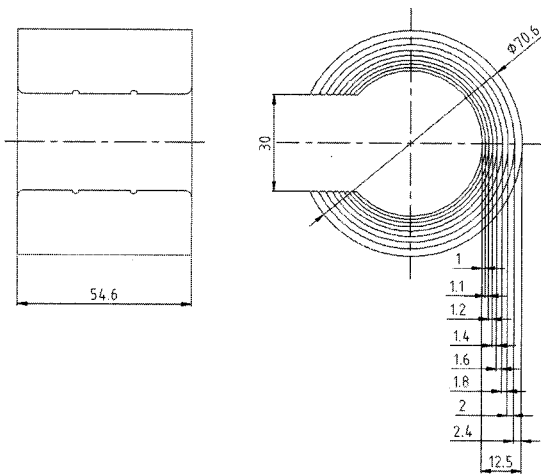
Dimensions of the sleeve spring pack used in MT881 Ka-500 Engine
